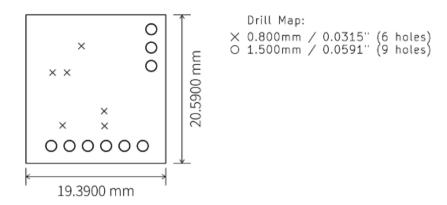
Fabrication drawing (drill drawing view) of the Thermistor Slave module.
